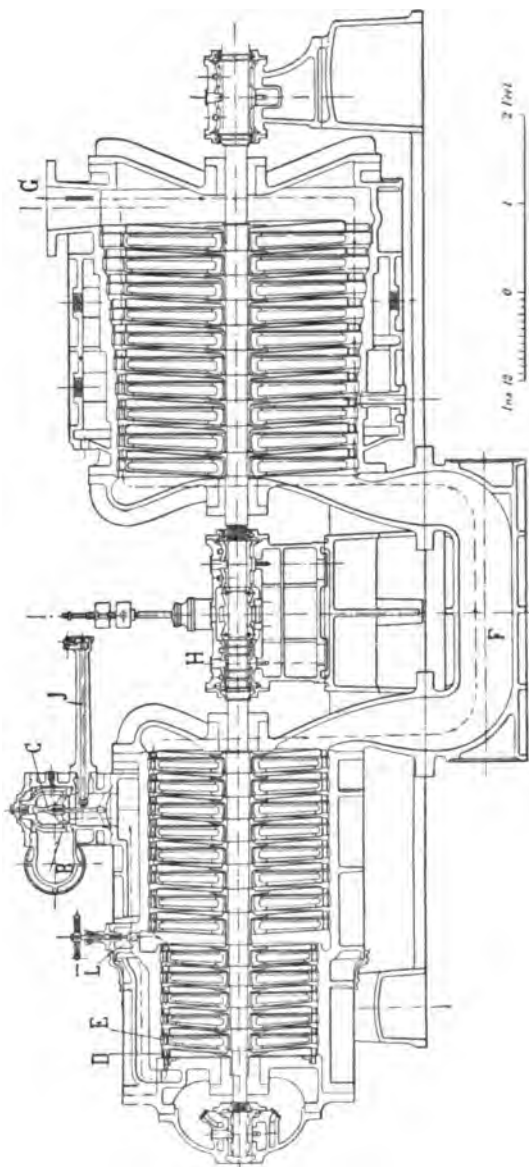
Rateau Steam Turbine with Separate Cylinders and Intermediate Bearing, at Peñarroya, Spain.
